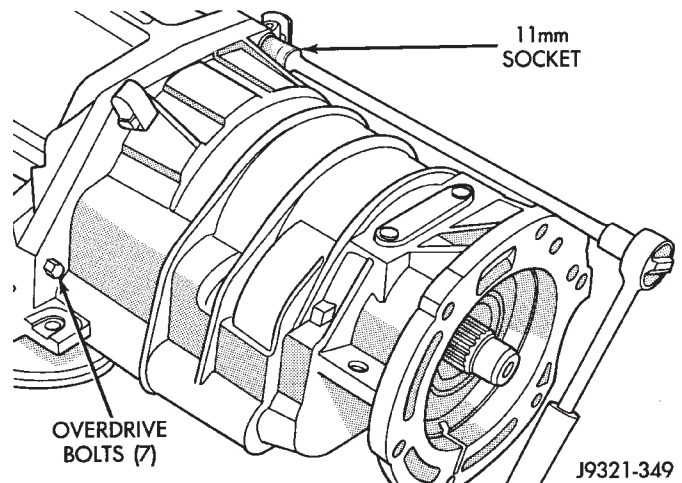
Removing/Installing Overdrive Unit Attaching Bolts
